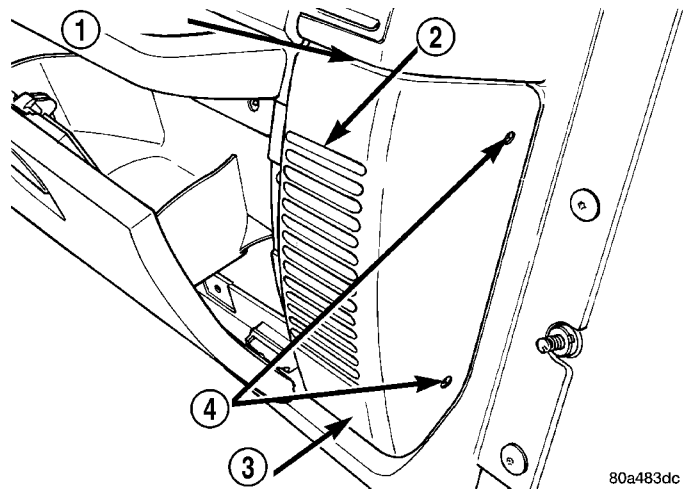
Instrument Panel Speaker Bezel Remove/Install
